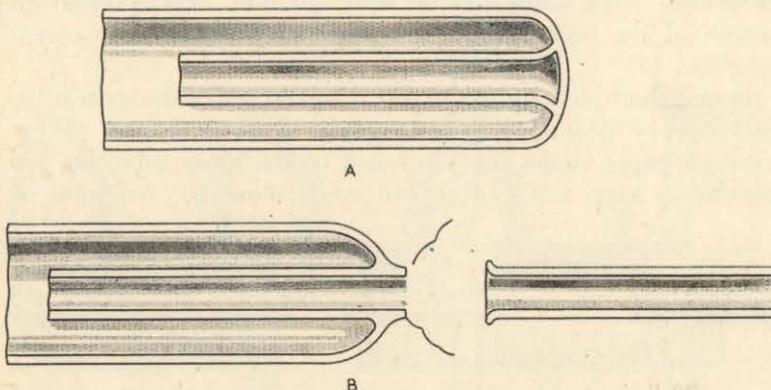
BLOWING OPERATIONS FOR A RING SEAL
